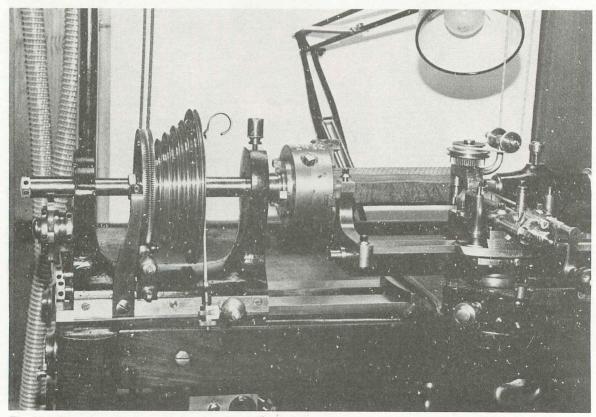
Three-jaw chuck mounted on headstock mandrel.
